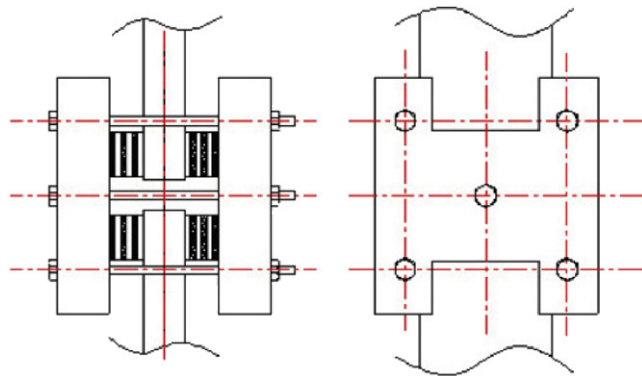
Attachment unit of the multilayer plates. The multilayer thickness does not respect the real dimension and is dilated.
